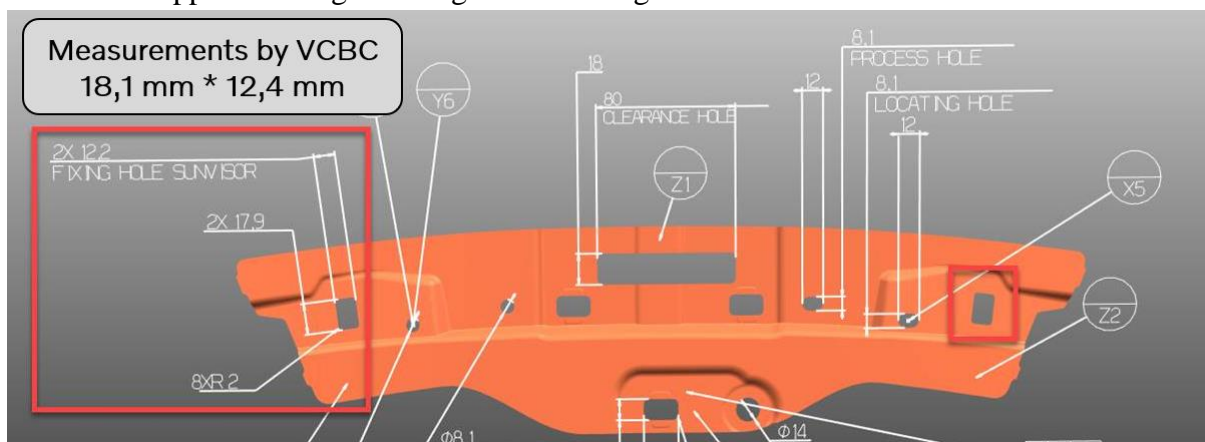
Measurements performed by VCBC on the hole for the attachment of the support bearing.
